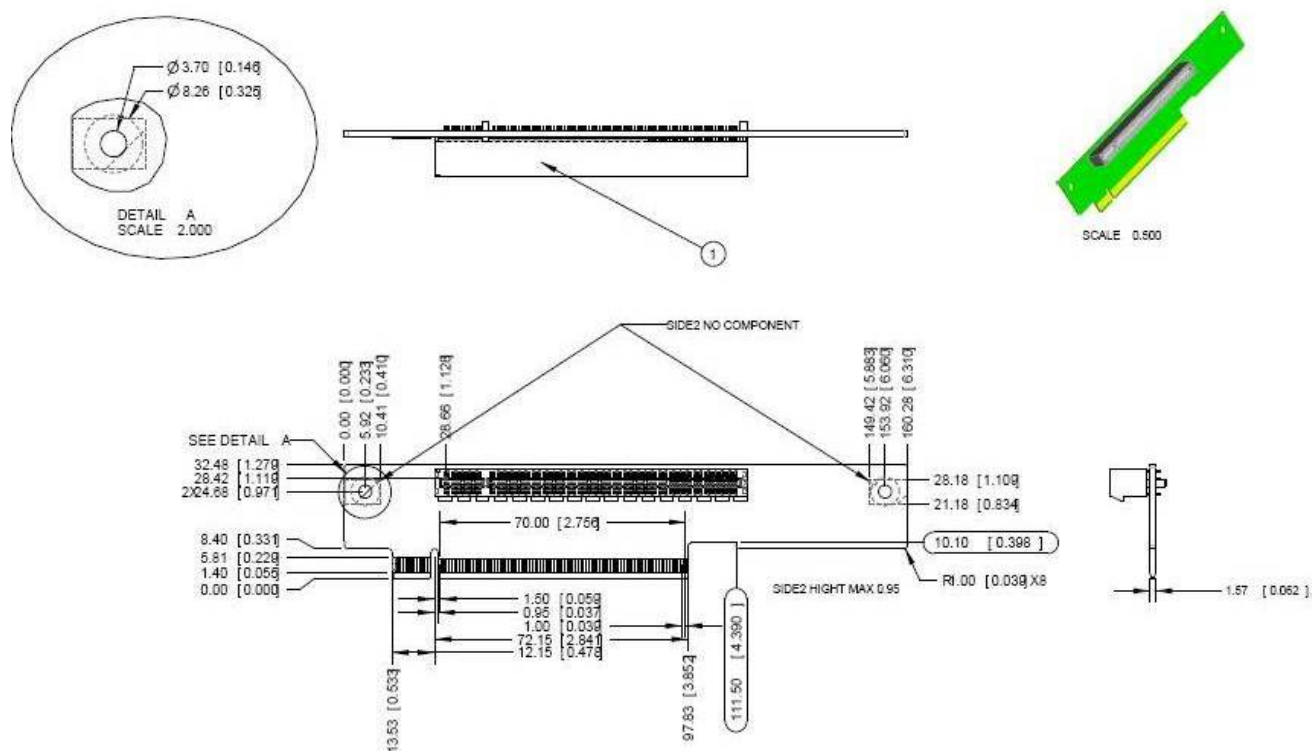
1U PCI Express* Gen 2 Riser Card Mechanical Drawing
